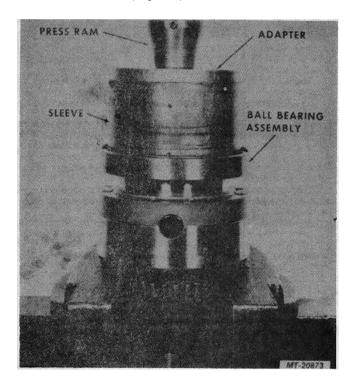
Pressing Ball Bearing Assembly on Inter-Axle Differential
